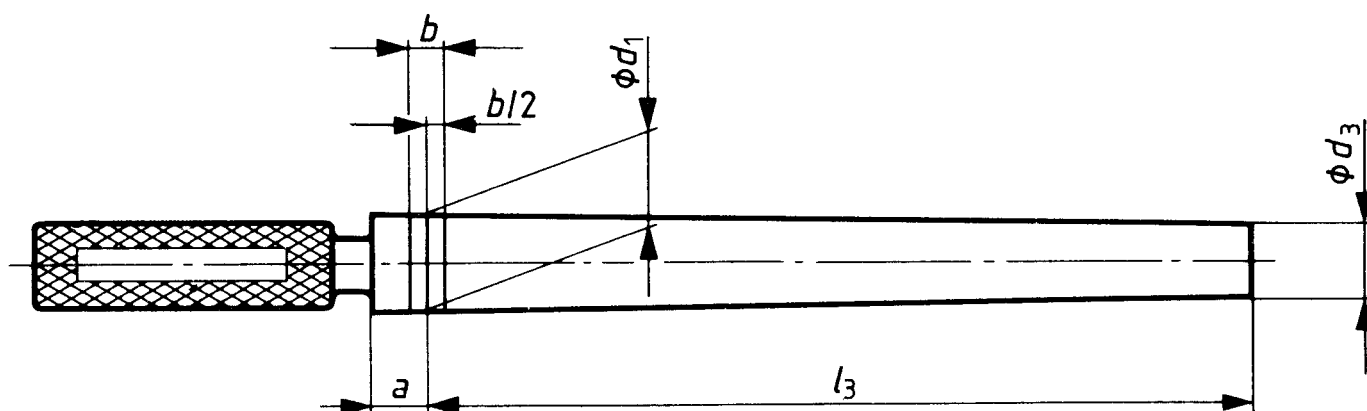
b) — Gauge with taper 1 : 64 for tubes type B
